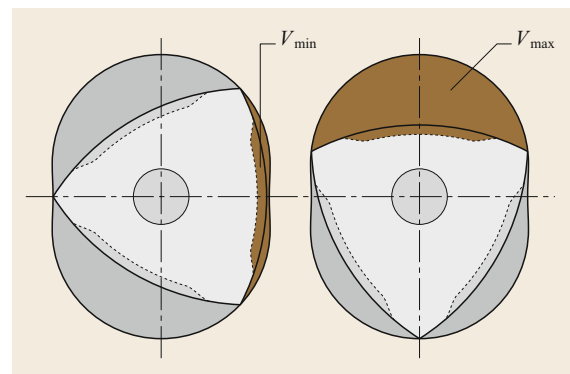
Wankel engine as an example of a rotary piston machine (after [17.2])
